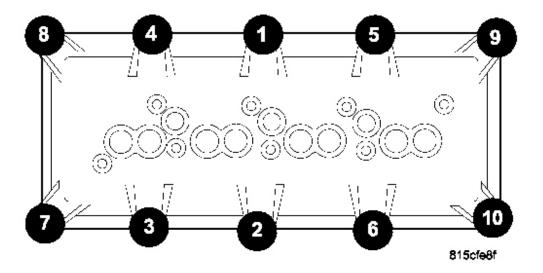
Cylinder Head Cover Torque Sequence Courtesy of CHRYSLER LLC
